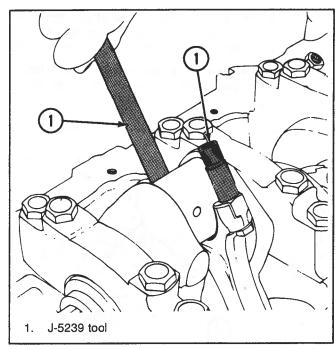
Pushing Out Connecting Rod and Piston Assembly
